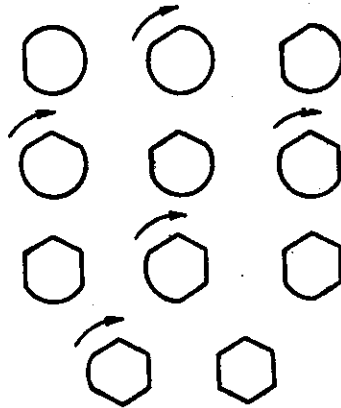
Milling hexagonal bolt by single side milling cutter
